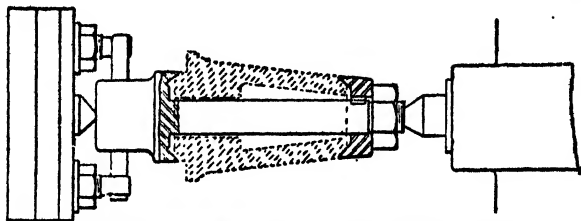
Special Mandrel for Holding Tapered Bushes.
